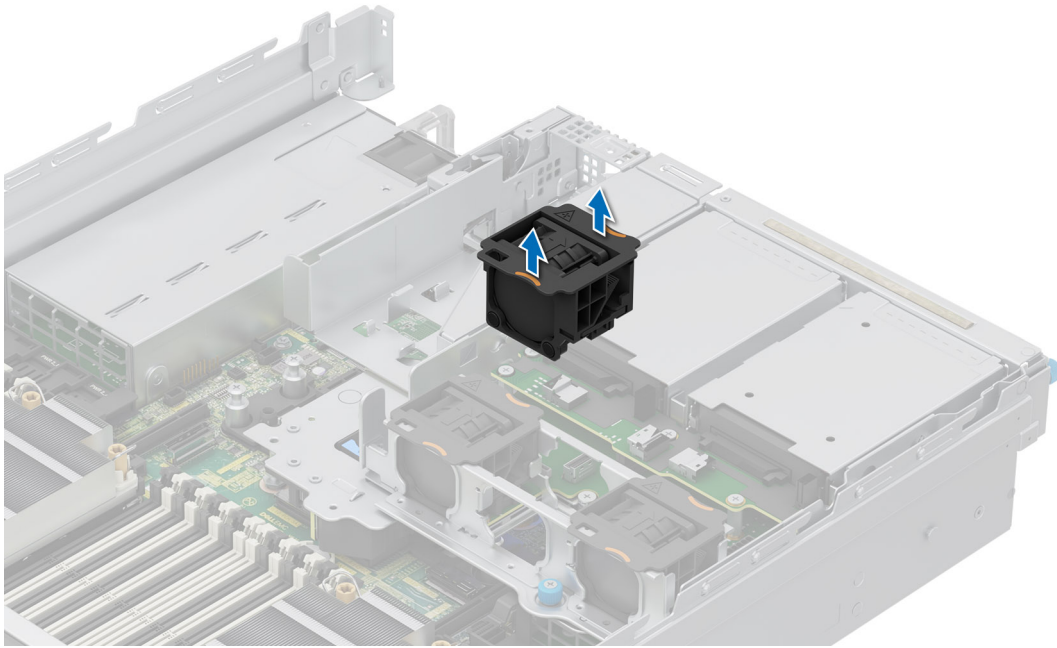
Removing a 4 x 2.5-inch rear drive module cooling fan
